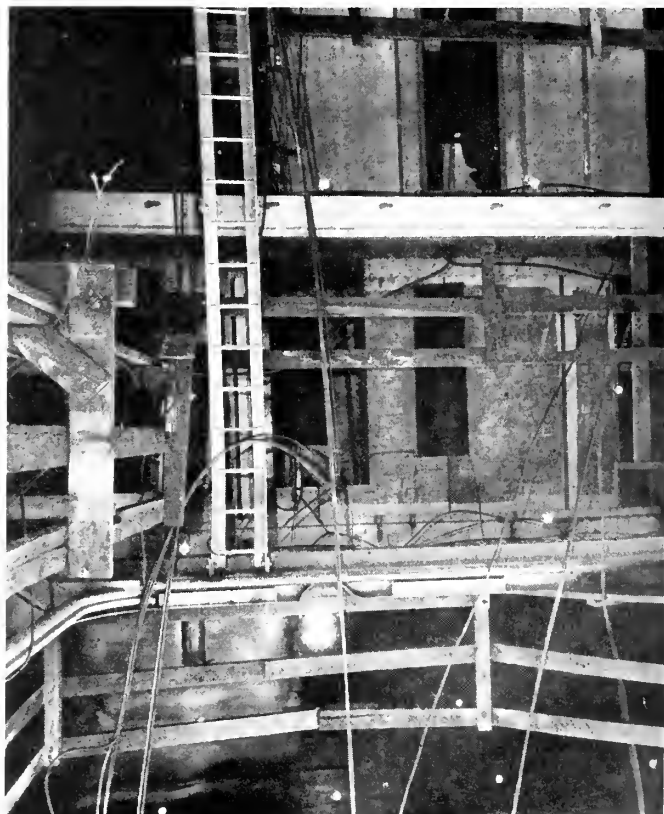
Cross sectional view, from hold of "A", "B" and "C" decks. "C" deck—Aetna all-steel class "B" bulkhead and metal joiner door frame installed ready for hanging of flush metal joiner door. "B" deck—Class "A" structural coaming and bulkhead welded into hull. Preliminary door cut-outs made.
